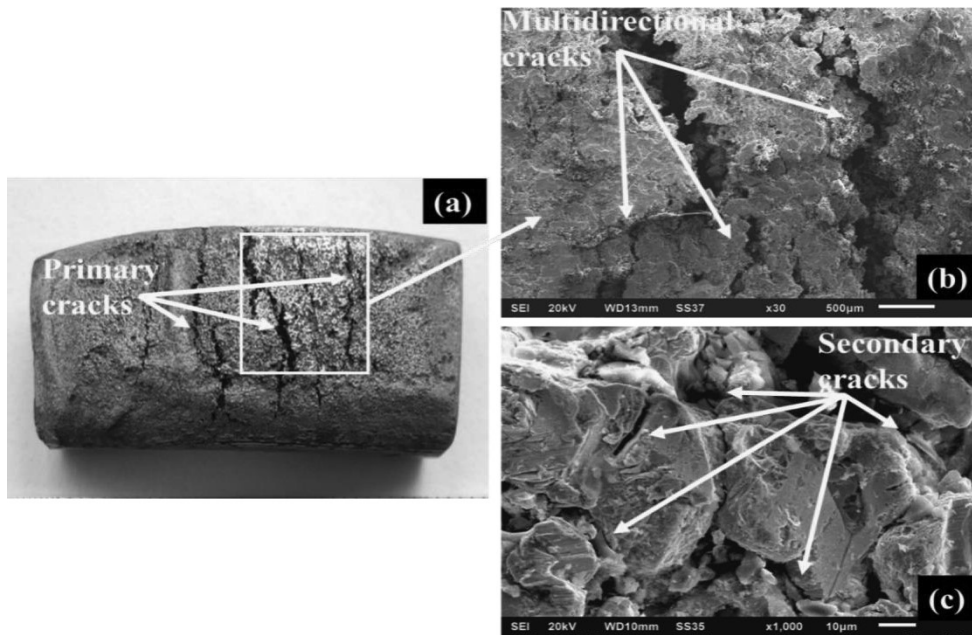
Fractured EWAC-30Cr₃C₂ clad specimen after 3-point bend test (a) Photograph of the top surface; SEM micrograph showing (b) primary cracks (c) secondary cracks
